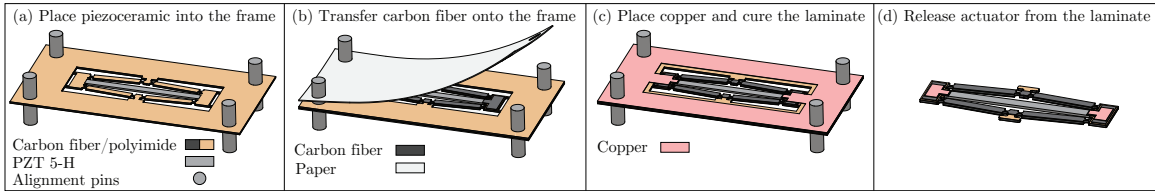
Key assembly steps: (a) Placement of piezoceramic beam in the laser-micromachined carbon fiber/polyimide frame. (b) Transfer of prepreg carbon fiber onto the assembly. (c) Placement of copper and curing of the laminate. (d) Following curing, the tabs are laser ablated to release the actuator from the laminate. A single actuator is shown for simplicity, but the process is easily parallelized to enable batch fabrication.
